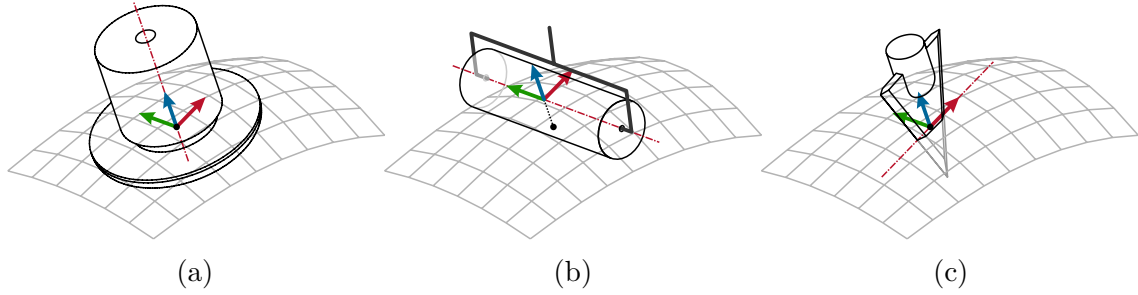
Examples for tools exhibiting a single-axis tool redundancy. (a) Polishing tool, (b) Draping tool, (c) Ultrasonic cutting tool.
